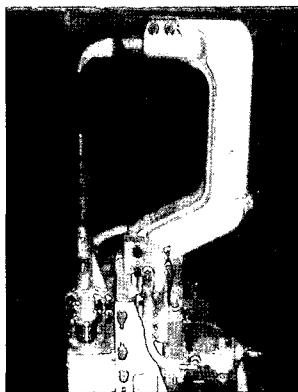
Photo of servo gun for resistance spot welding
